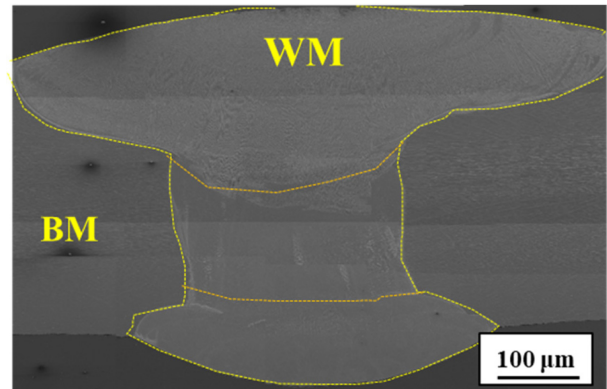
Cross-sectional macro image of the welded sample
